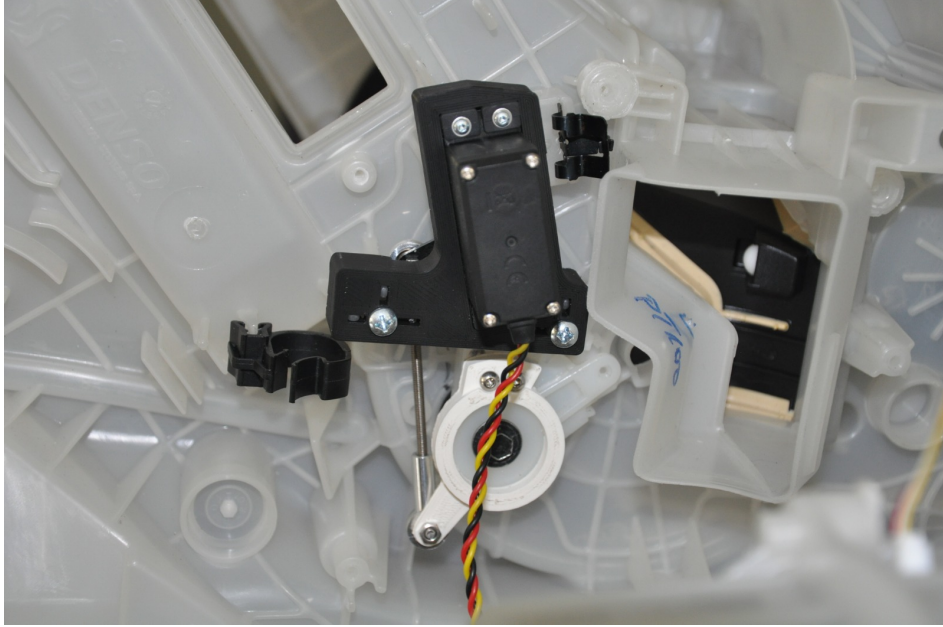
Mounting of a servo motor on the HVAC-Box [7].
